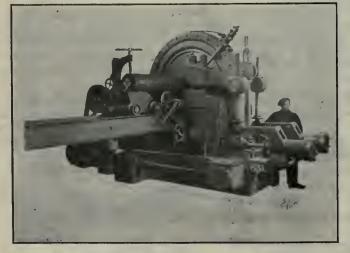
FRONT VIEW 12-IN. HEAVY DUTY CUTTING-OFF MACHINE.
